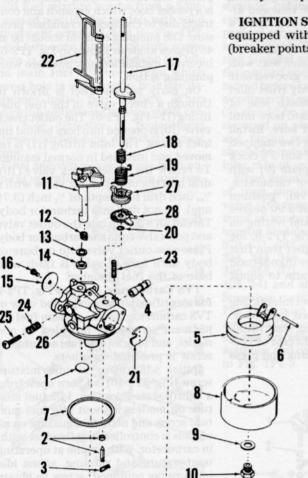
Exploded view of typical TVS type carburetor.
